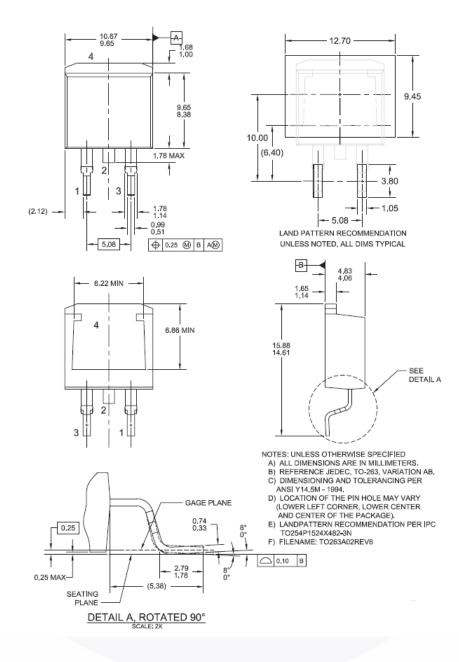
TO263 (D²PAK), Molded, 2-Lead, Surface Mount
